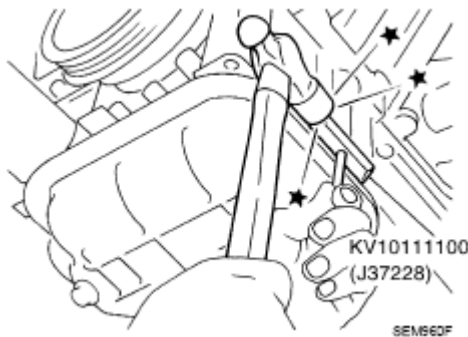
Inserting Seal Cutter (SST) Between Oil Pan (Upper) And Oil Pan (Lower)
